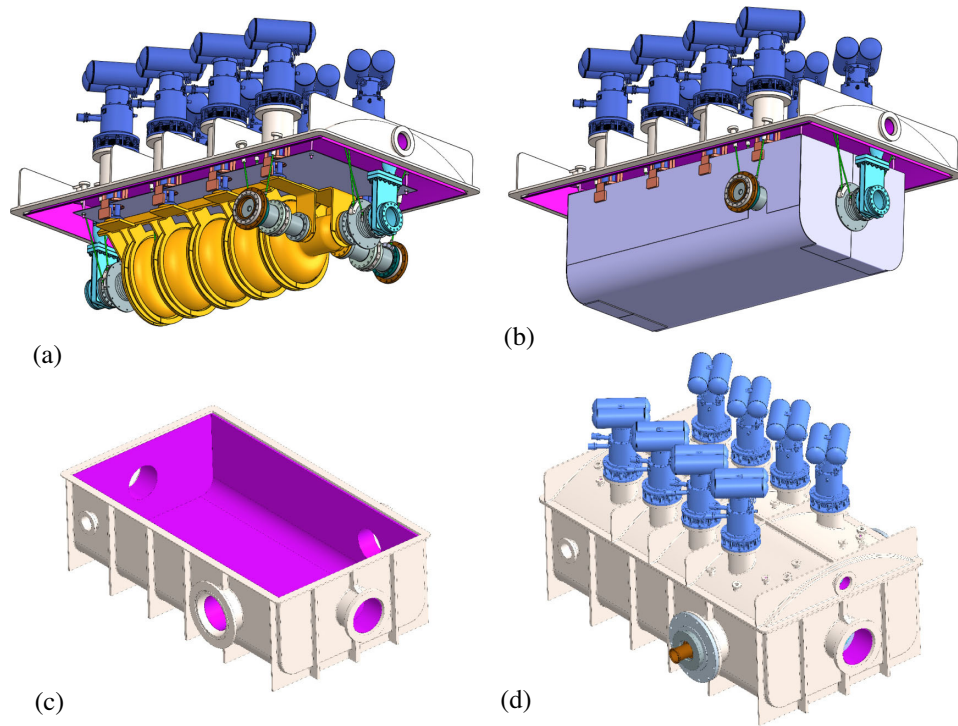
Cryomodule assembly sequence. (a) Installation of the beam line assembly and cryocoolers on the vacuum vessel lid. (b) Installation of the thermal shield. (c) Installation of the bottom half of the magnetic shield inside the vacuum vessel tub and (d) fully assembled cryomodule.
